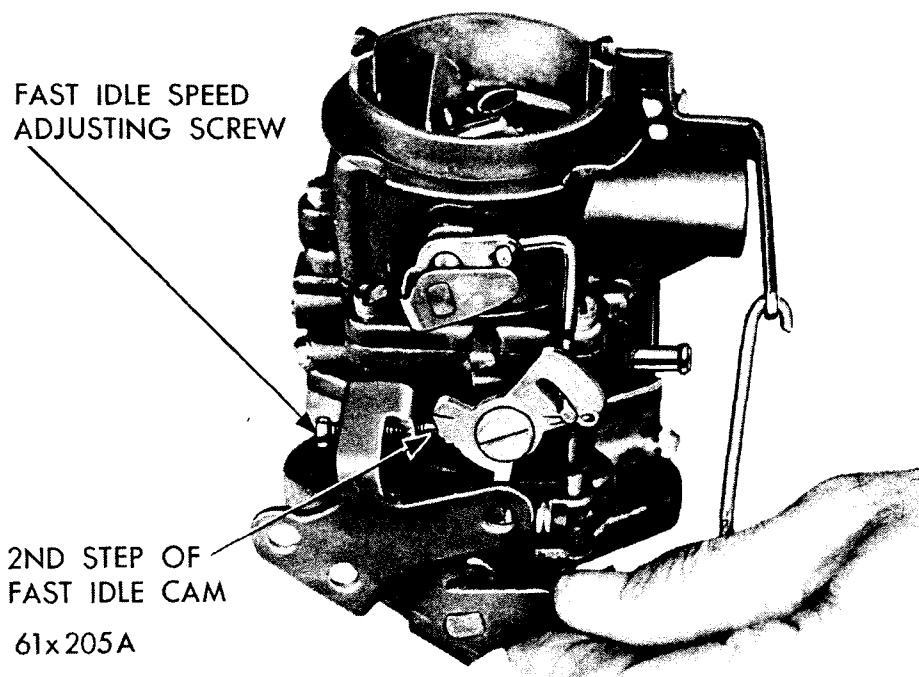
Fast Idle Adjusting Screw on 2nd Step of Fast Idle Cam
